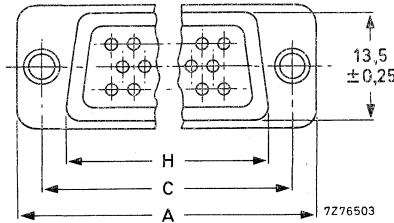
Terminal side of pin (or socket) connector; see also Table 6.
